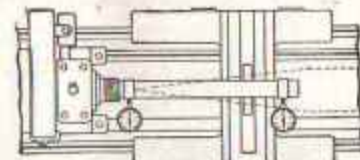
Testing Alignment of Headstock Spindle with Bed
